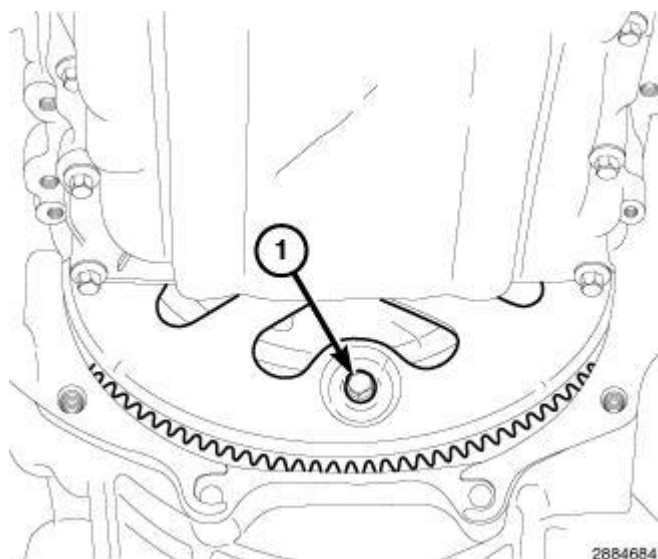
Flexplate/Torque Converter Retaining Bolts
